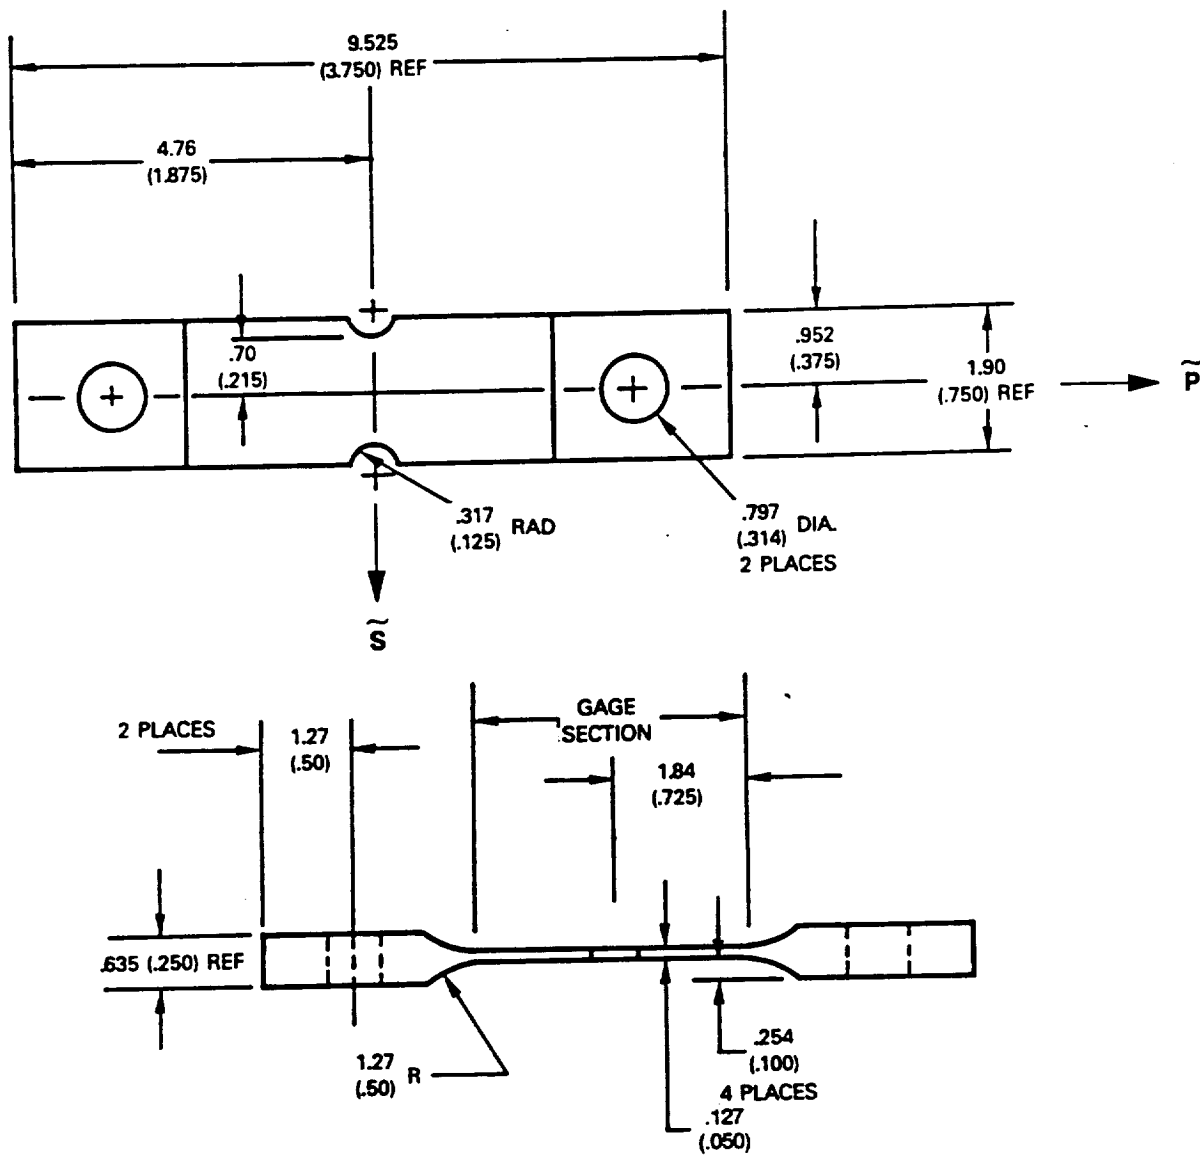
Thin Mild Notched Fatigue Specimen Geometry – cm (in.)
